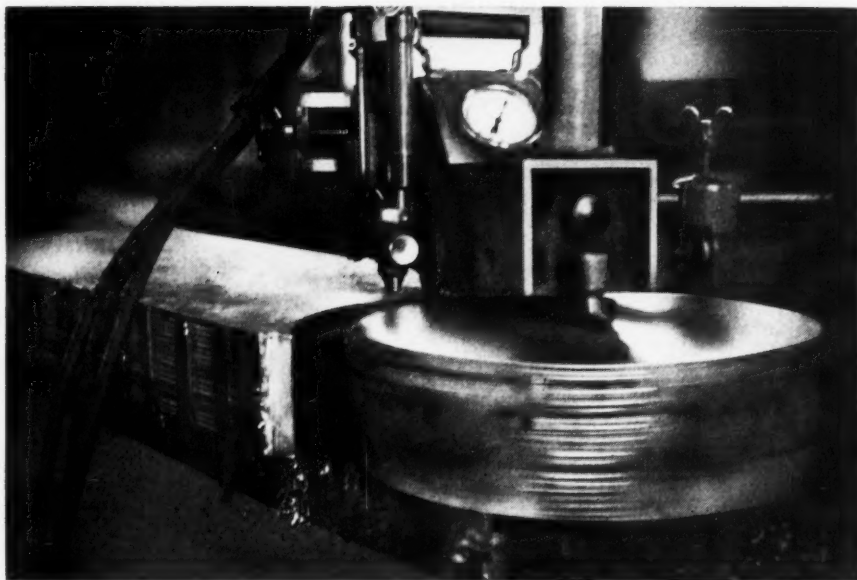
Stack-cutting Twenty Small Circular Plates with a Portable Cutting Machine, Using Welding Beads to Replace Other Clamping Means
